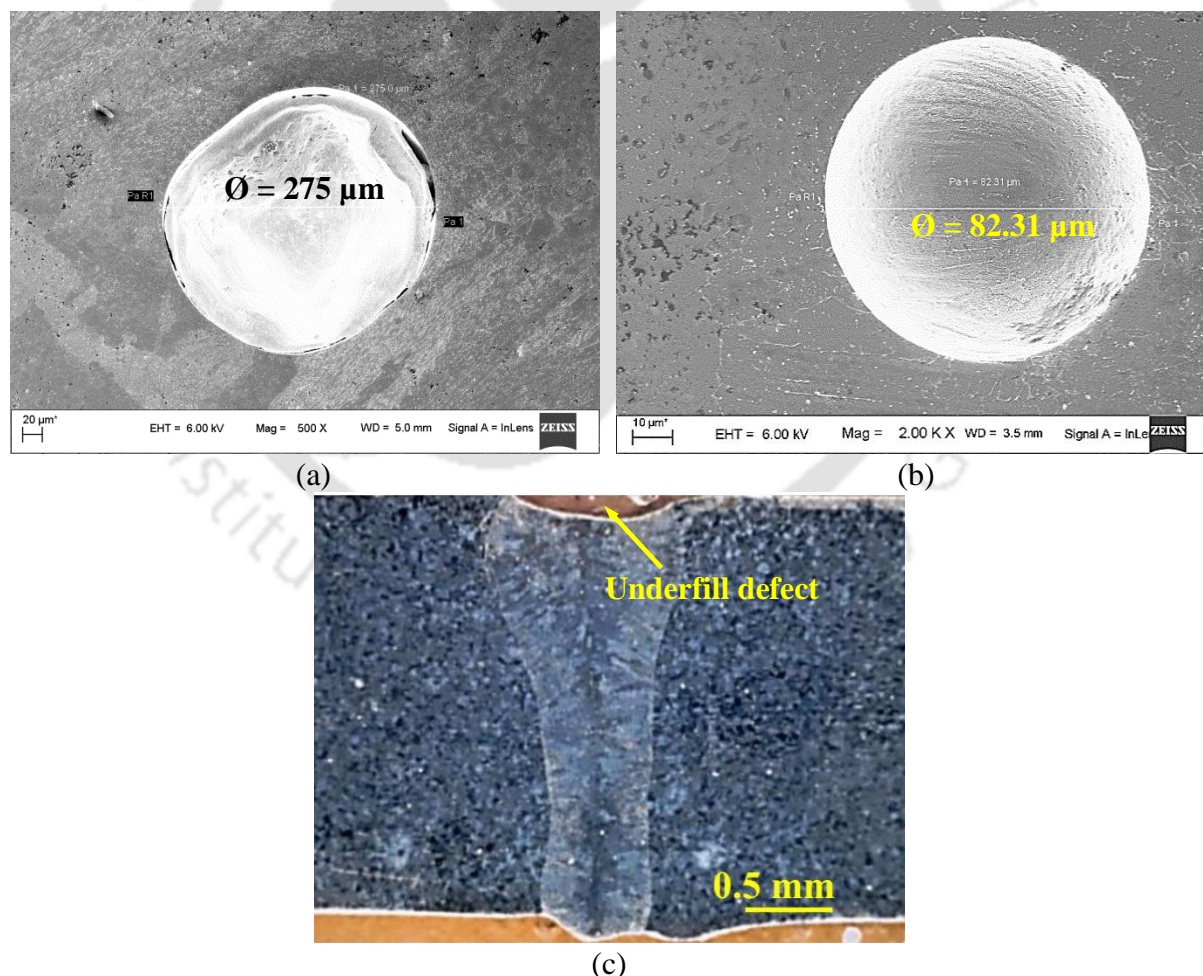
Porosity in FZ for Experiment No. (a) 1 and (b) 11; (c) Underfill defects in weld bead for Exp. 2
